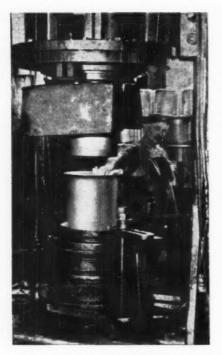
The third and final redraw performed in a large toggle joint drawing press.
